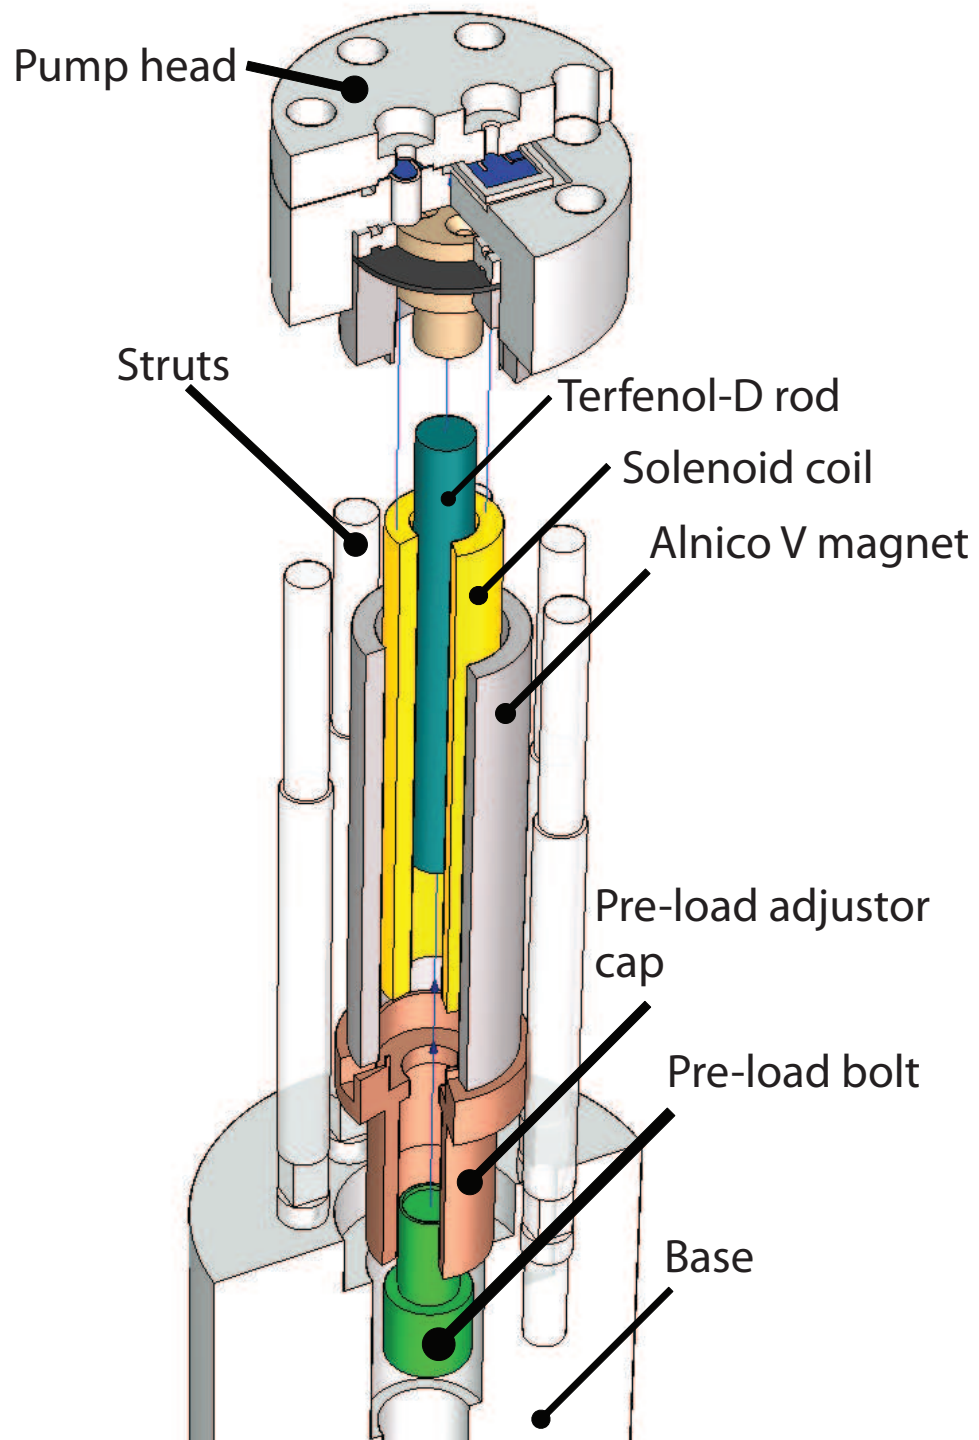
3D exploded, sectioned view of Terfenol-D pump.
